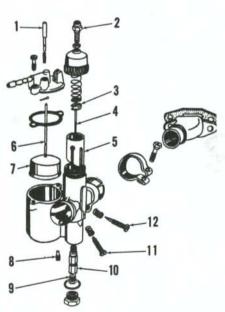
Exploded view of Fisher-Amal carburetor used on 175cc models.
